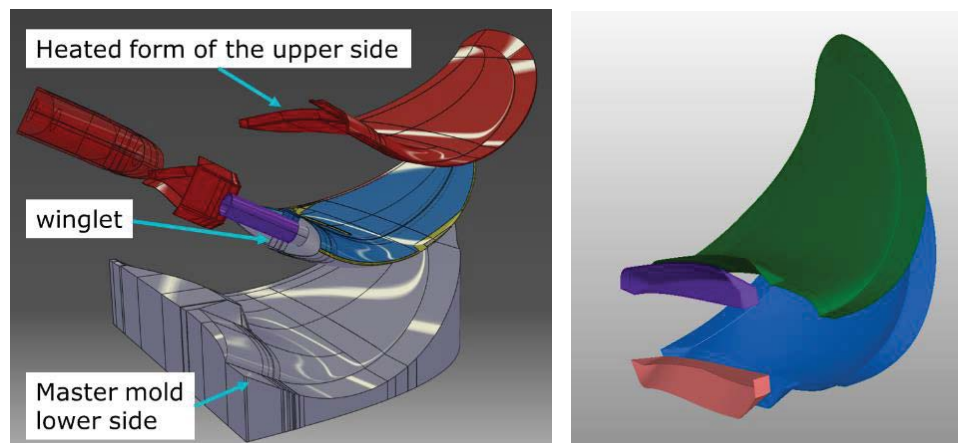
Left: the construction of molds and wing, Right: separation area and the four mold elements for final production process of winglet
